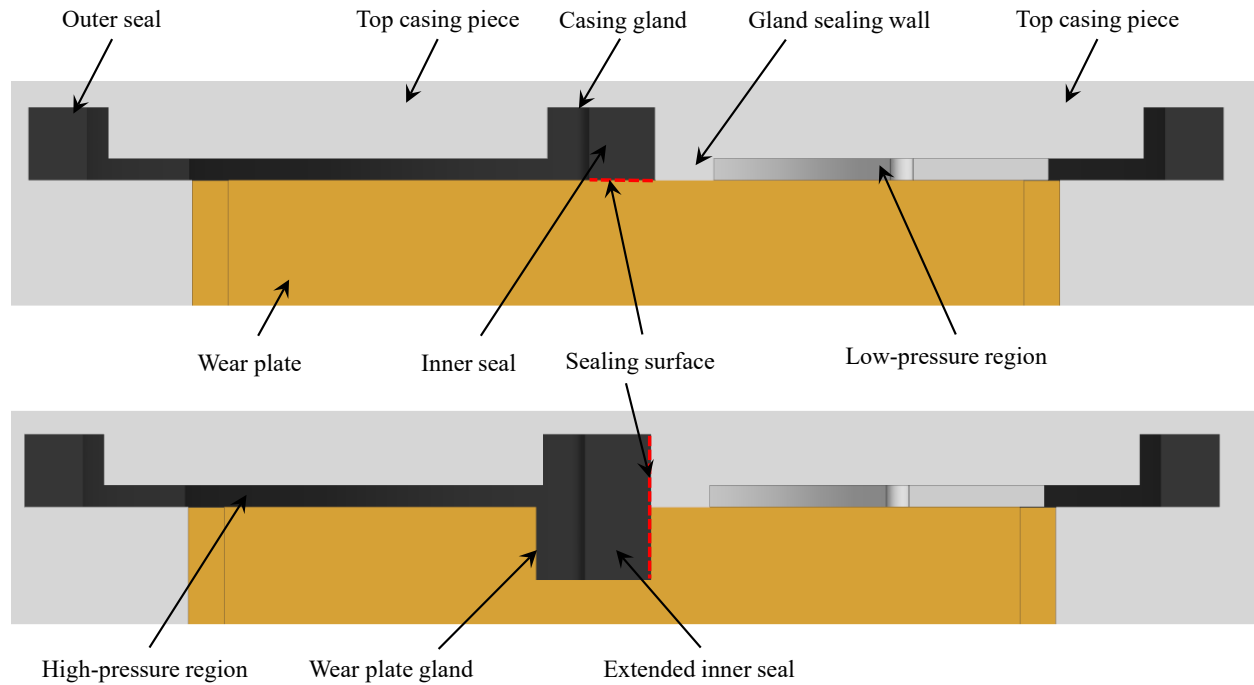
Cross section of the top casing-wear plate interface and two gland-and-seal design variants: parallel sealing surface with casing gland only (*top*), and orthogonal sealing surface using a mating wear plate gland with extended inner seal (*bottom*)
